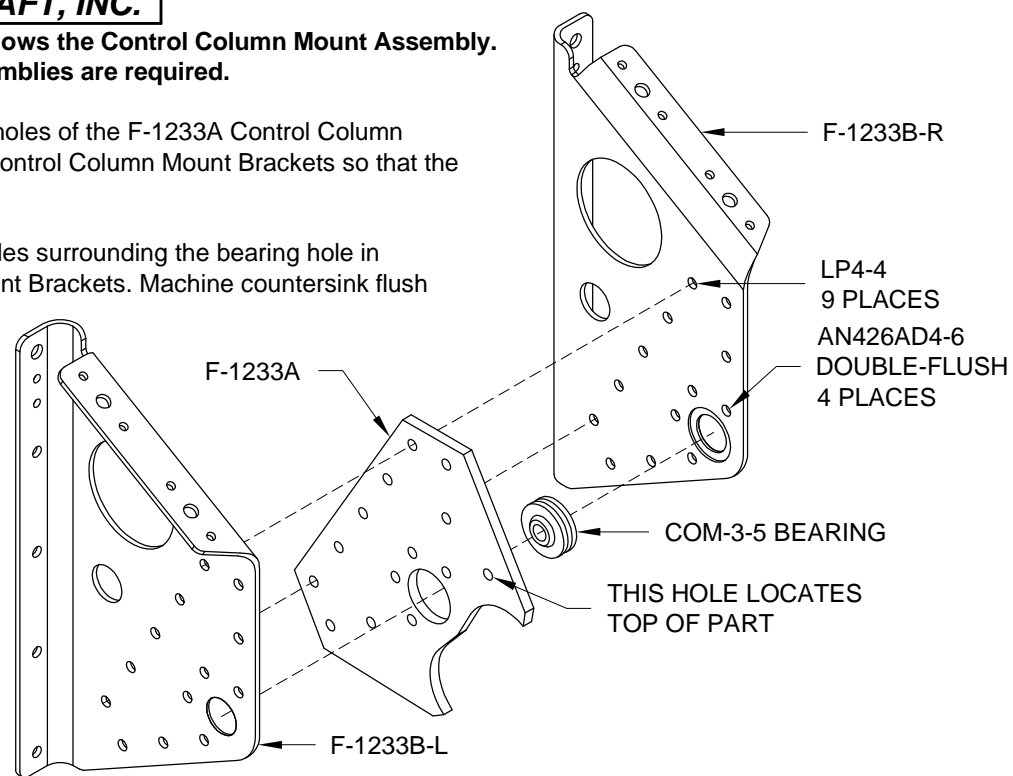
CONTROL COLUMN MOUNT ASSEMBLY
